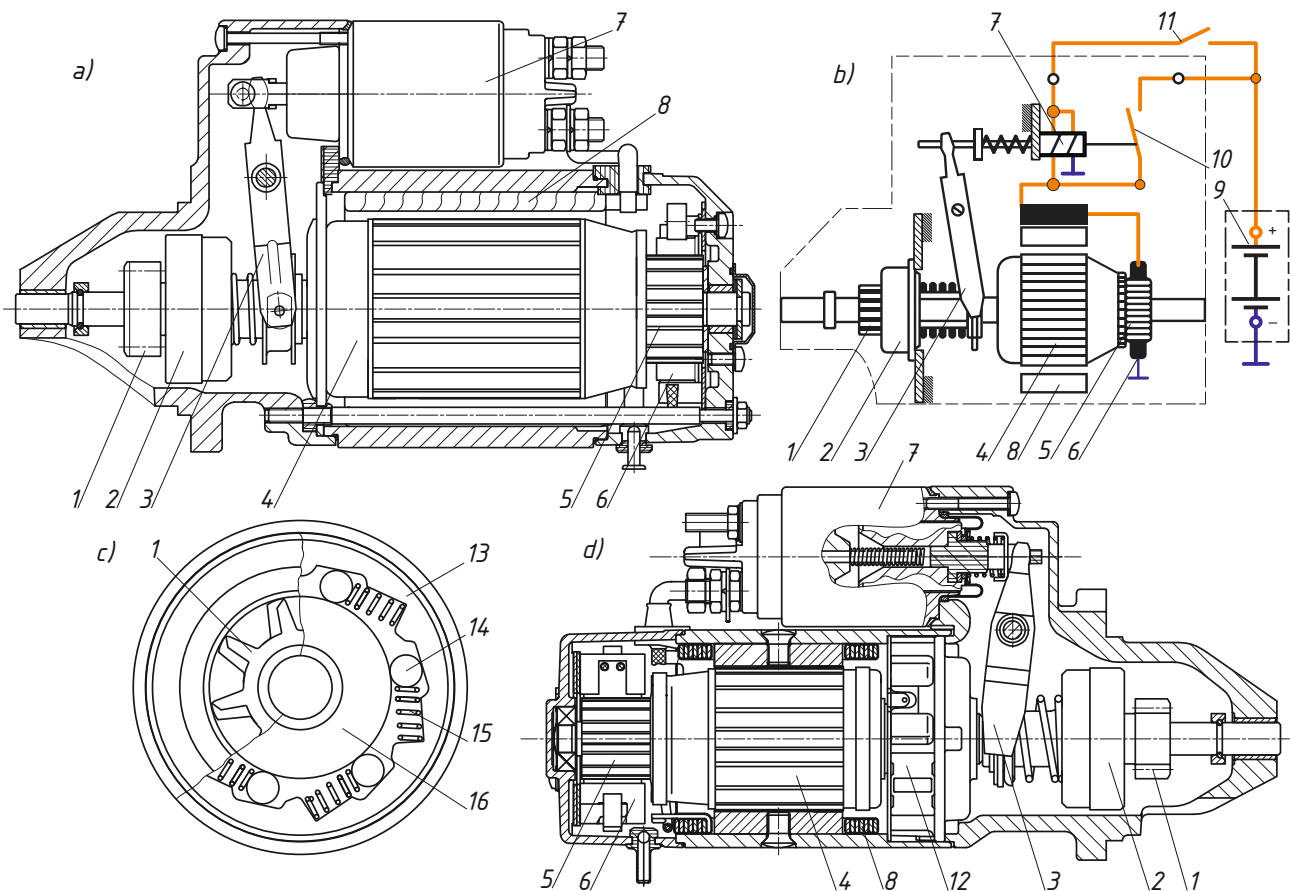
Electric starter with direct drive (a) and its connection diagram (b), roller safety clutch (c), electric starter with reduction gear (d): 1 – engagement gear with ring gear on the flywheel; 2 – roller safety clutch; 3 – drive lever for engaging the gear; 4 – rotor; 5 – collector; 6 – brush mechanism; 7 – solenoid relay; 8 – stator winding; 9 – battery; 10 – central switch of the retractor relay; 11 – starter switch; 12 – planetary gearbox; 13 – safety clutch stator; 14 – rollers; 15 – spring; 16 – safety clutch rotor (adapted from [4])
